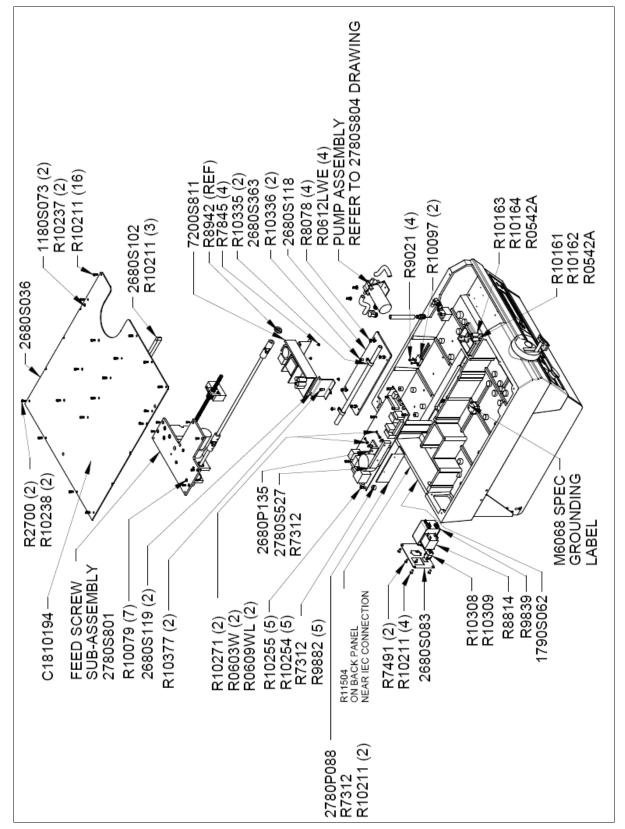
Bottom View of IsoMet 5000 Assembly Diagram (2780900C)
